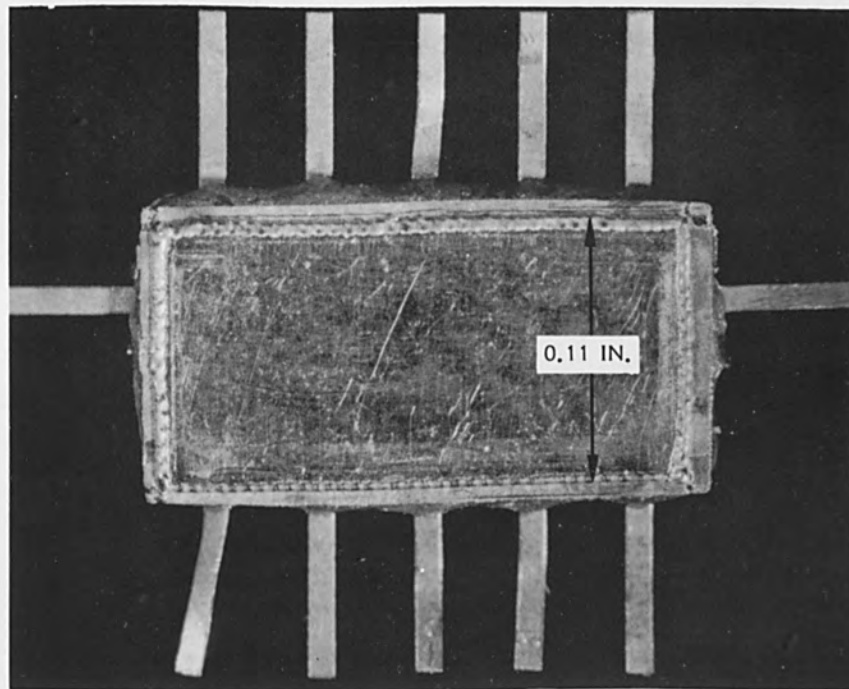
Cover Welded to Solid State Receptacle
